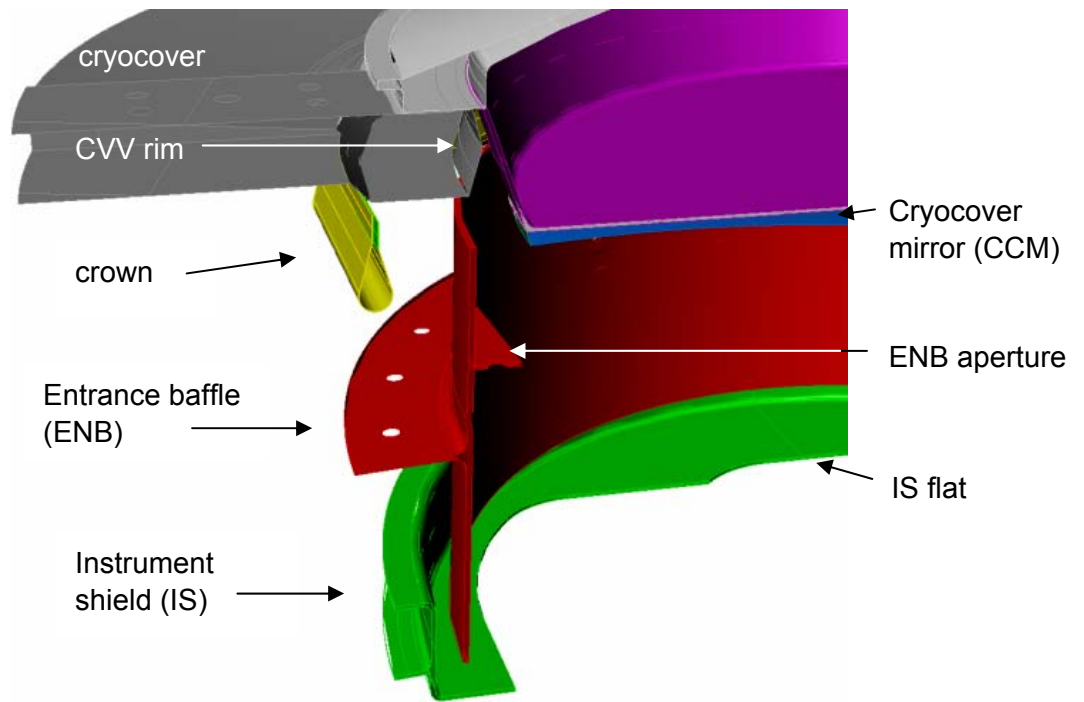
cross sectional view through the cryostat cavity with the cryocover mirror closed (CAD model).
